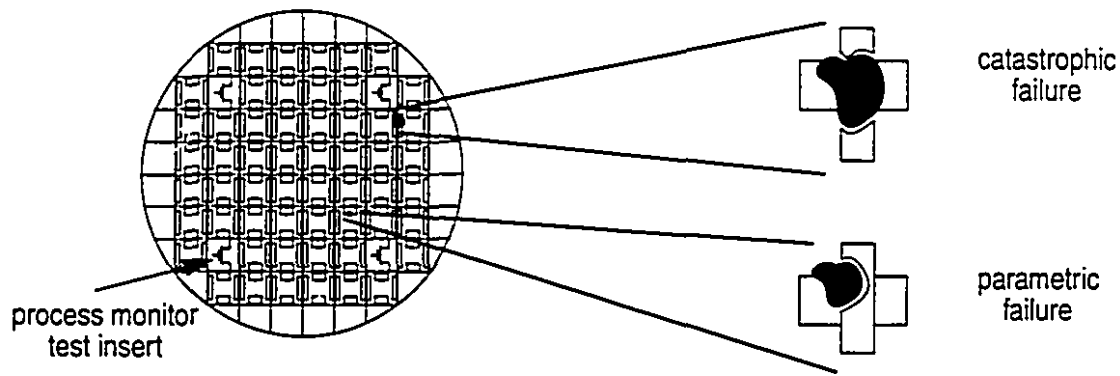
The Two Failure Modes Due To Manufacturing Defects
